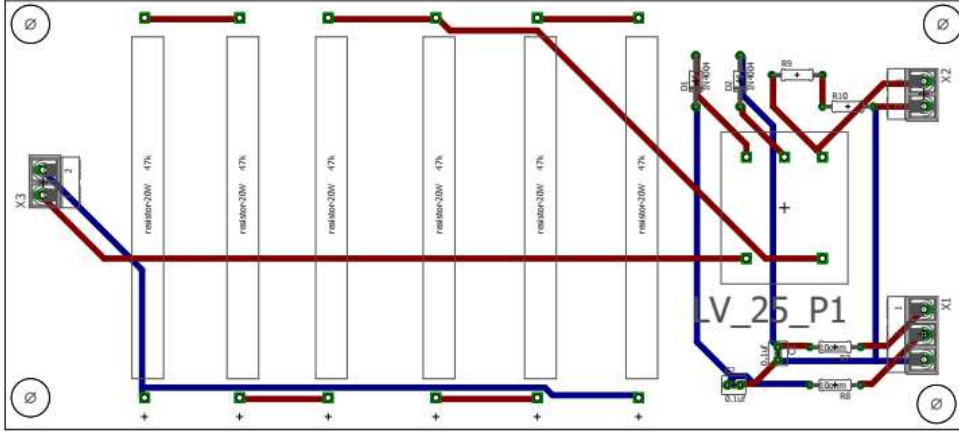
PCB layout of voltage sensor LV-25P/SP2
